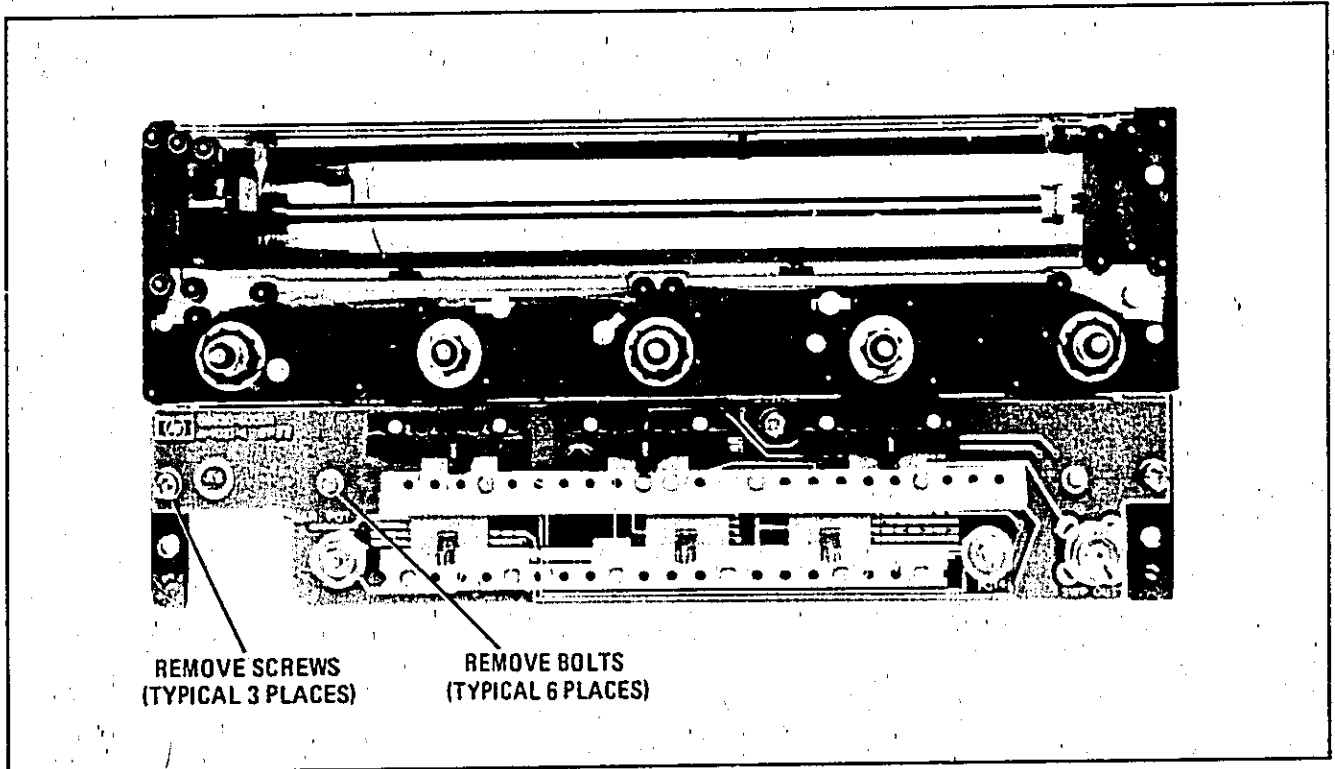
Removal and Disassembly of A9 Switch Assy and A10 Front Interconnect Assy
